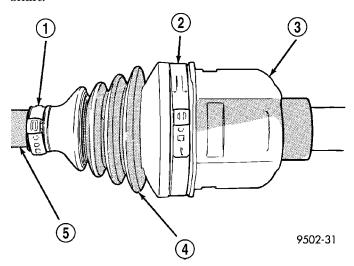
Inner Tripod Joint Sealing Boot Clamps
